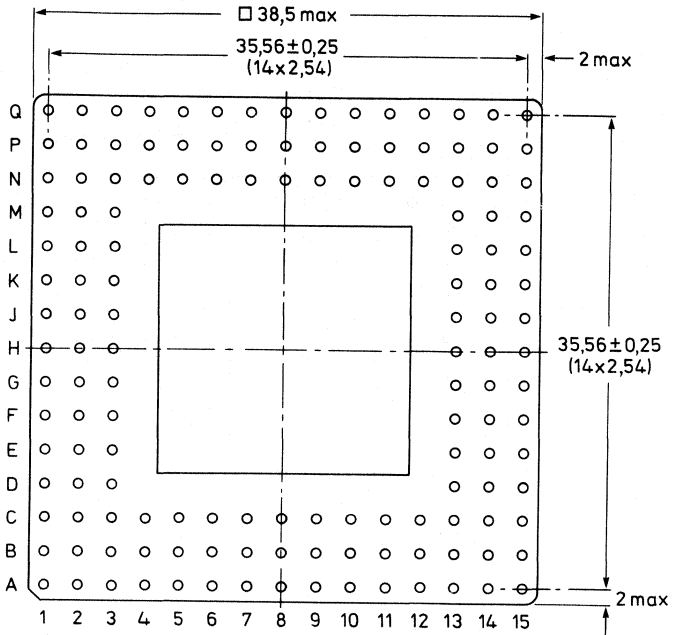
Mechanical data FO-128 (FO-108 with heatsink). Dimensions in mm.
